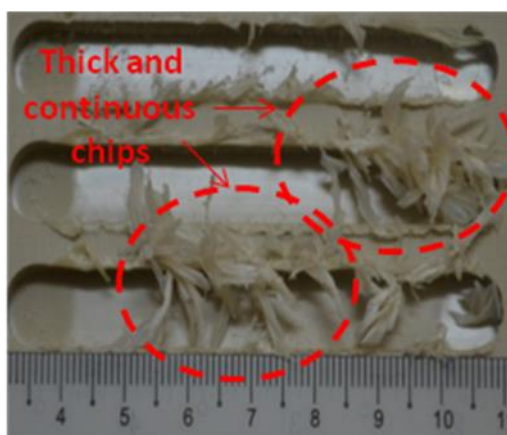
Thick and continuous chip morphology and burr formation with large helix angle.
